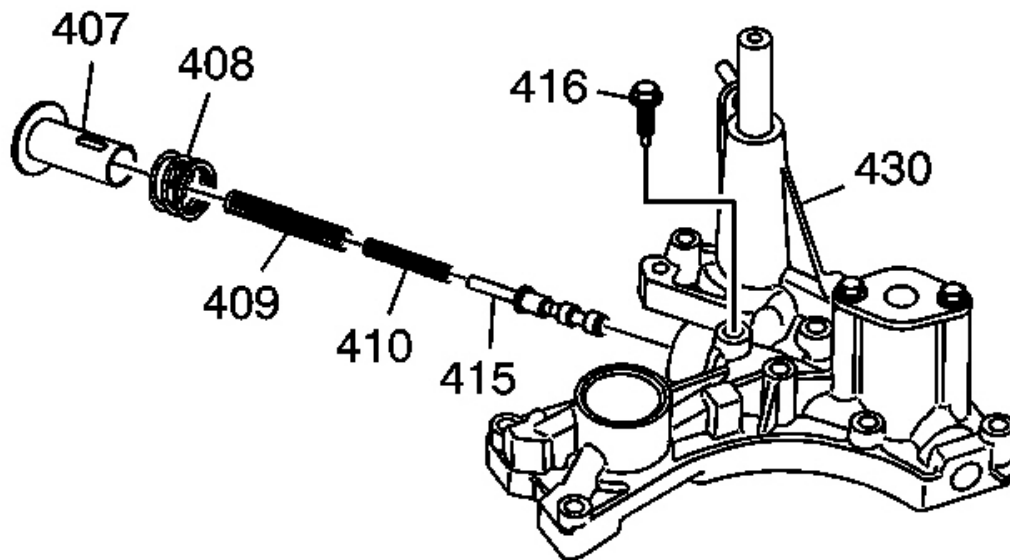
Pressure Regulator Valve Spring Cap Guide & Bolt
